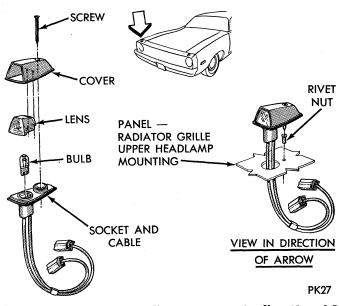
Fender Turn Indicator Lamp—Carline X and S
